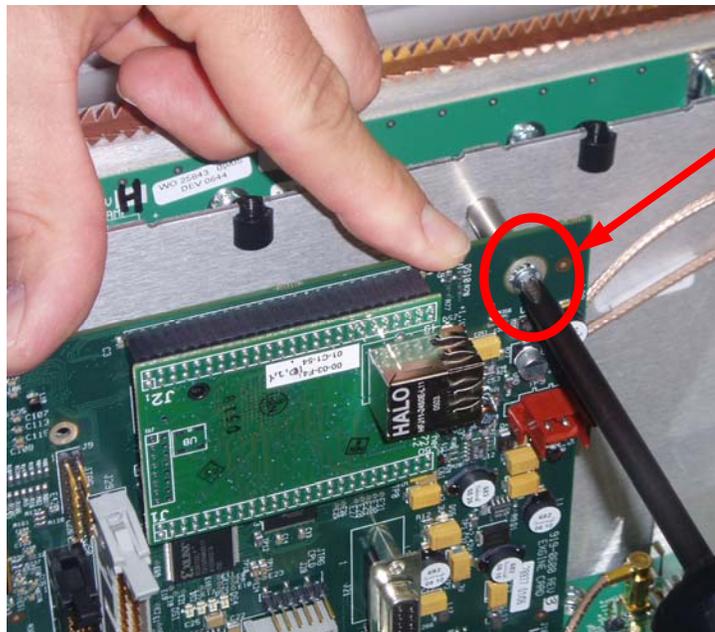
Install the Engine Card into the FXi Exciter Chassis
